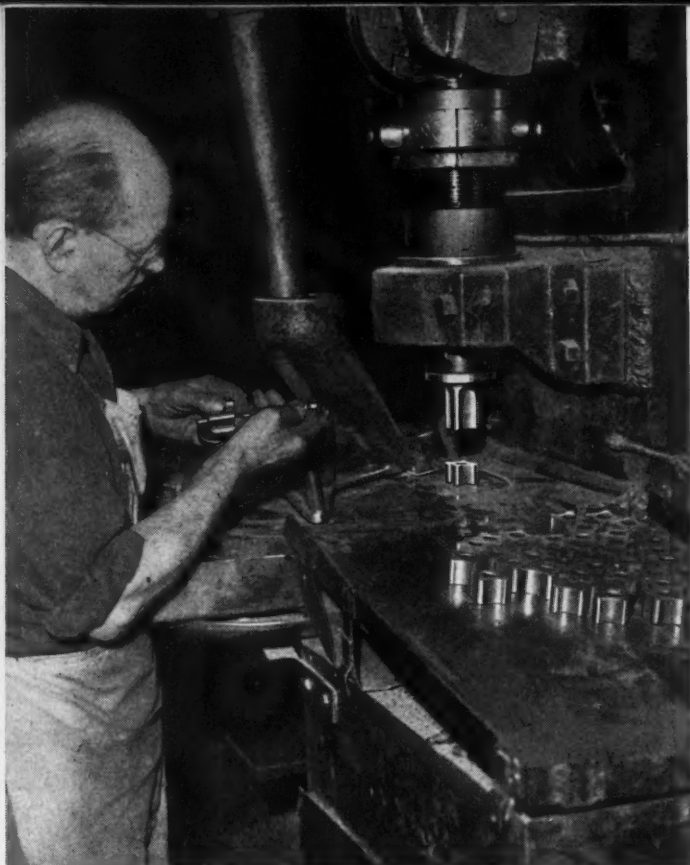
Operation in which Iron Powder is being Transformed into Briquettes of Special Four-tooth Impeller Gears which will be Placed in Use without Any Machining Operations
